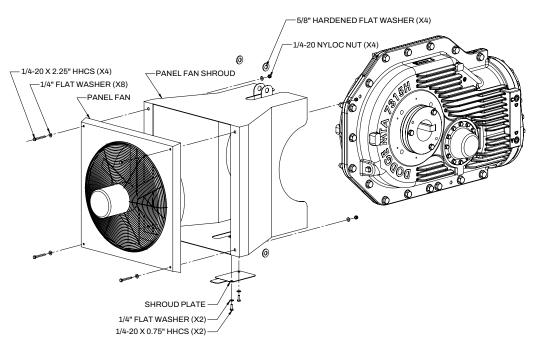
Electric Fan Assembly (MTA Sizes 7 & 8)
